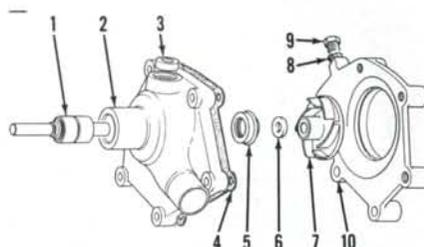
Exploded view of typical water pump showing component parts and their relative positions. Pump body design varies, but basic assembly is the same.
